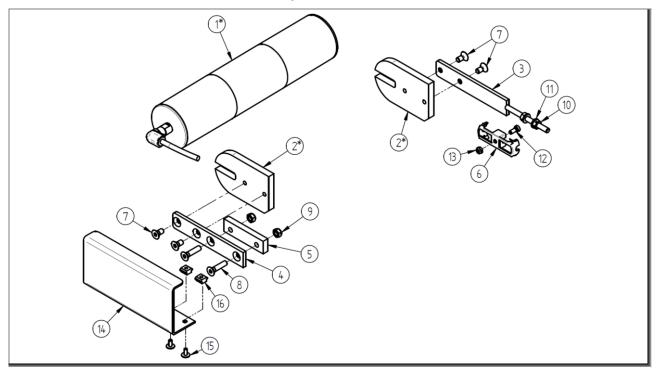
Parts list: Drum motor - drive unit - position of drive unit 14 - ZZ.900.0094.01
